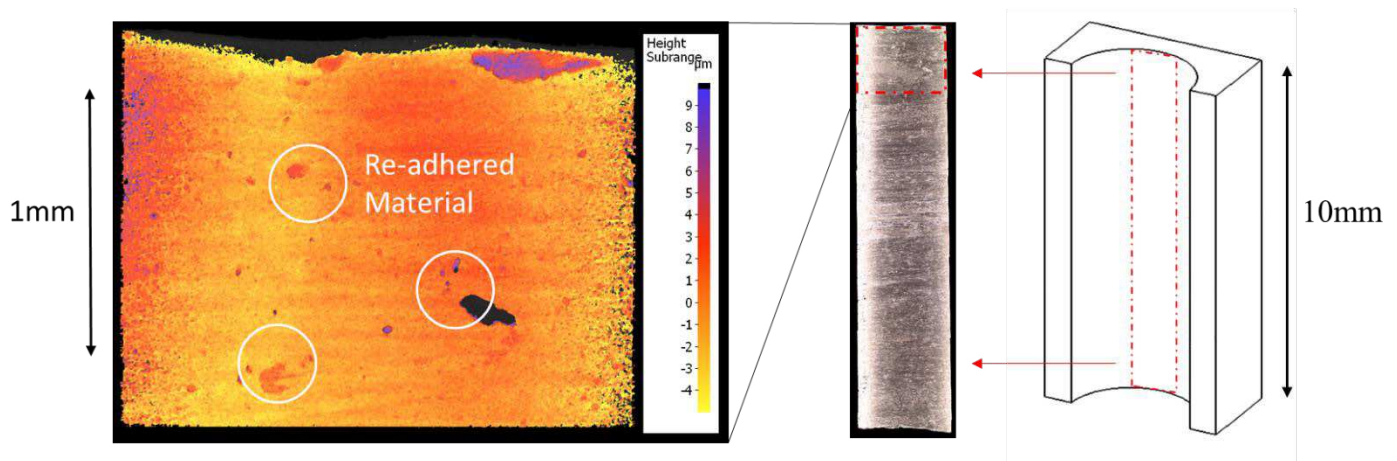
Alicona image showing Re-adhered material on the machined surface of a 6.9 mm hole that was drilled using a coated tool at  $v_f$ 275 and  $v_c$ 46.4.
